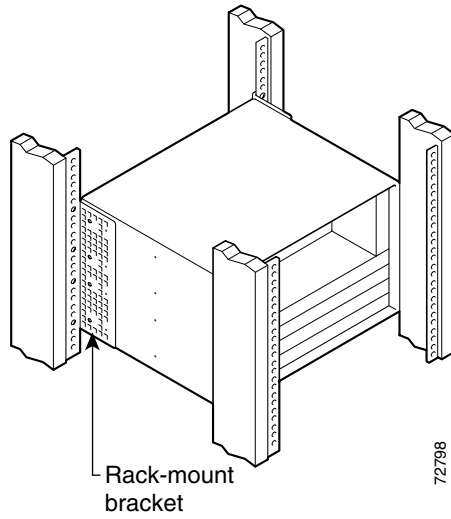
Typical 4-Post Equipment Rack Posts and Mounting Strips
